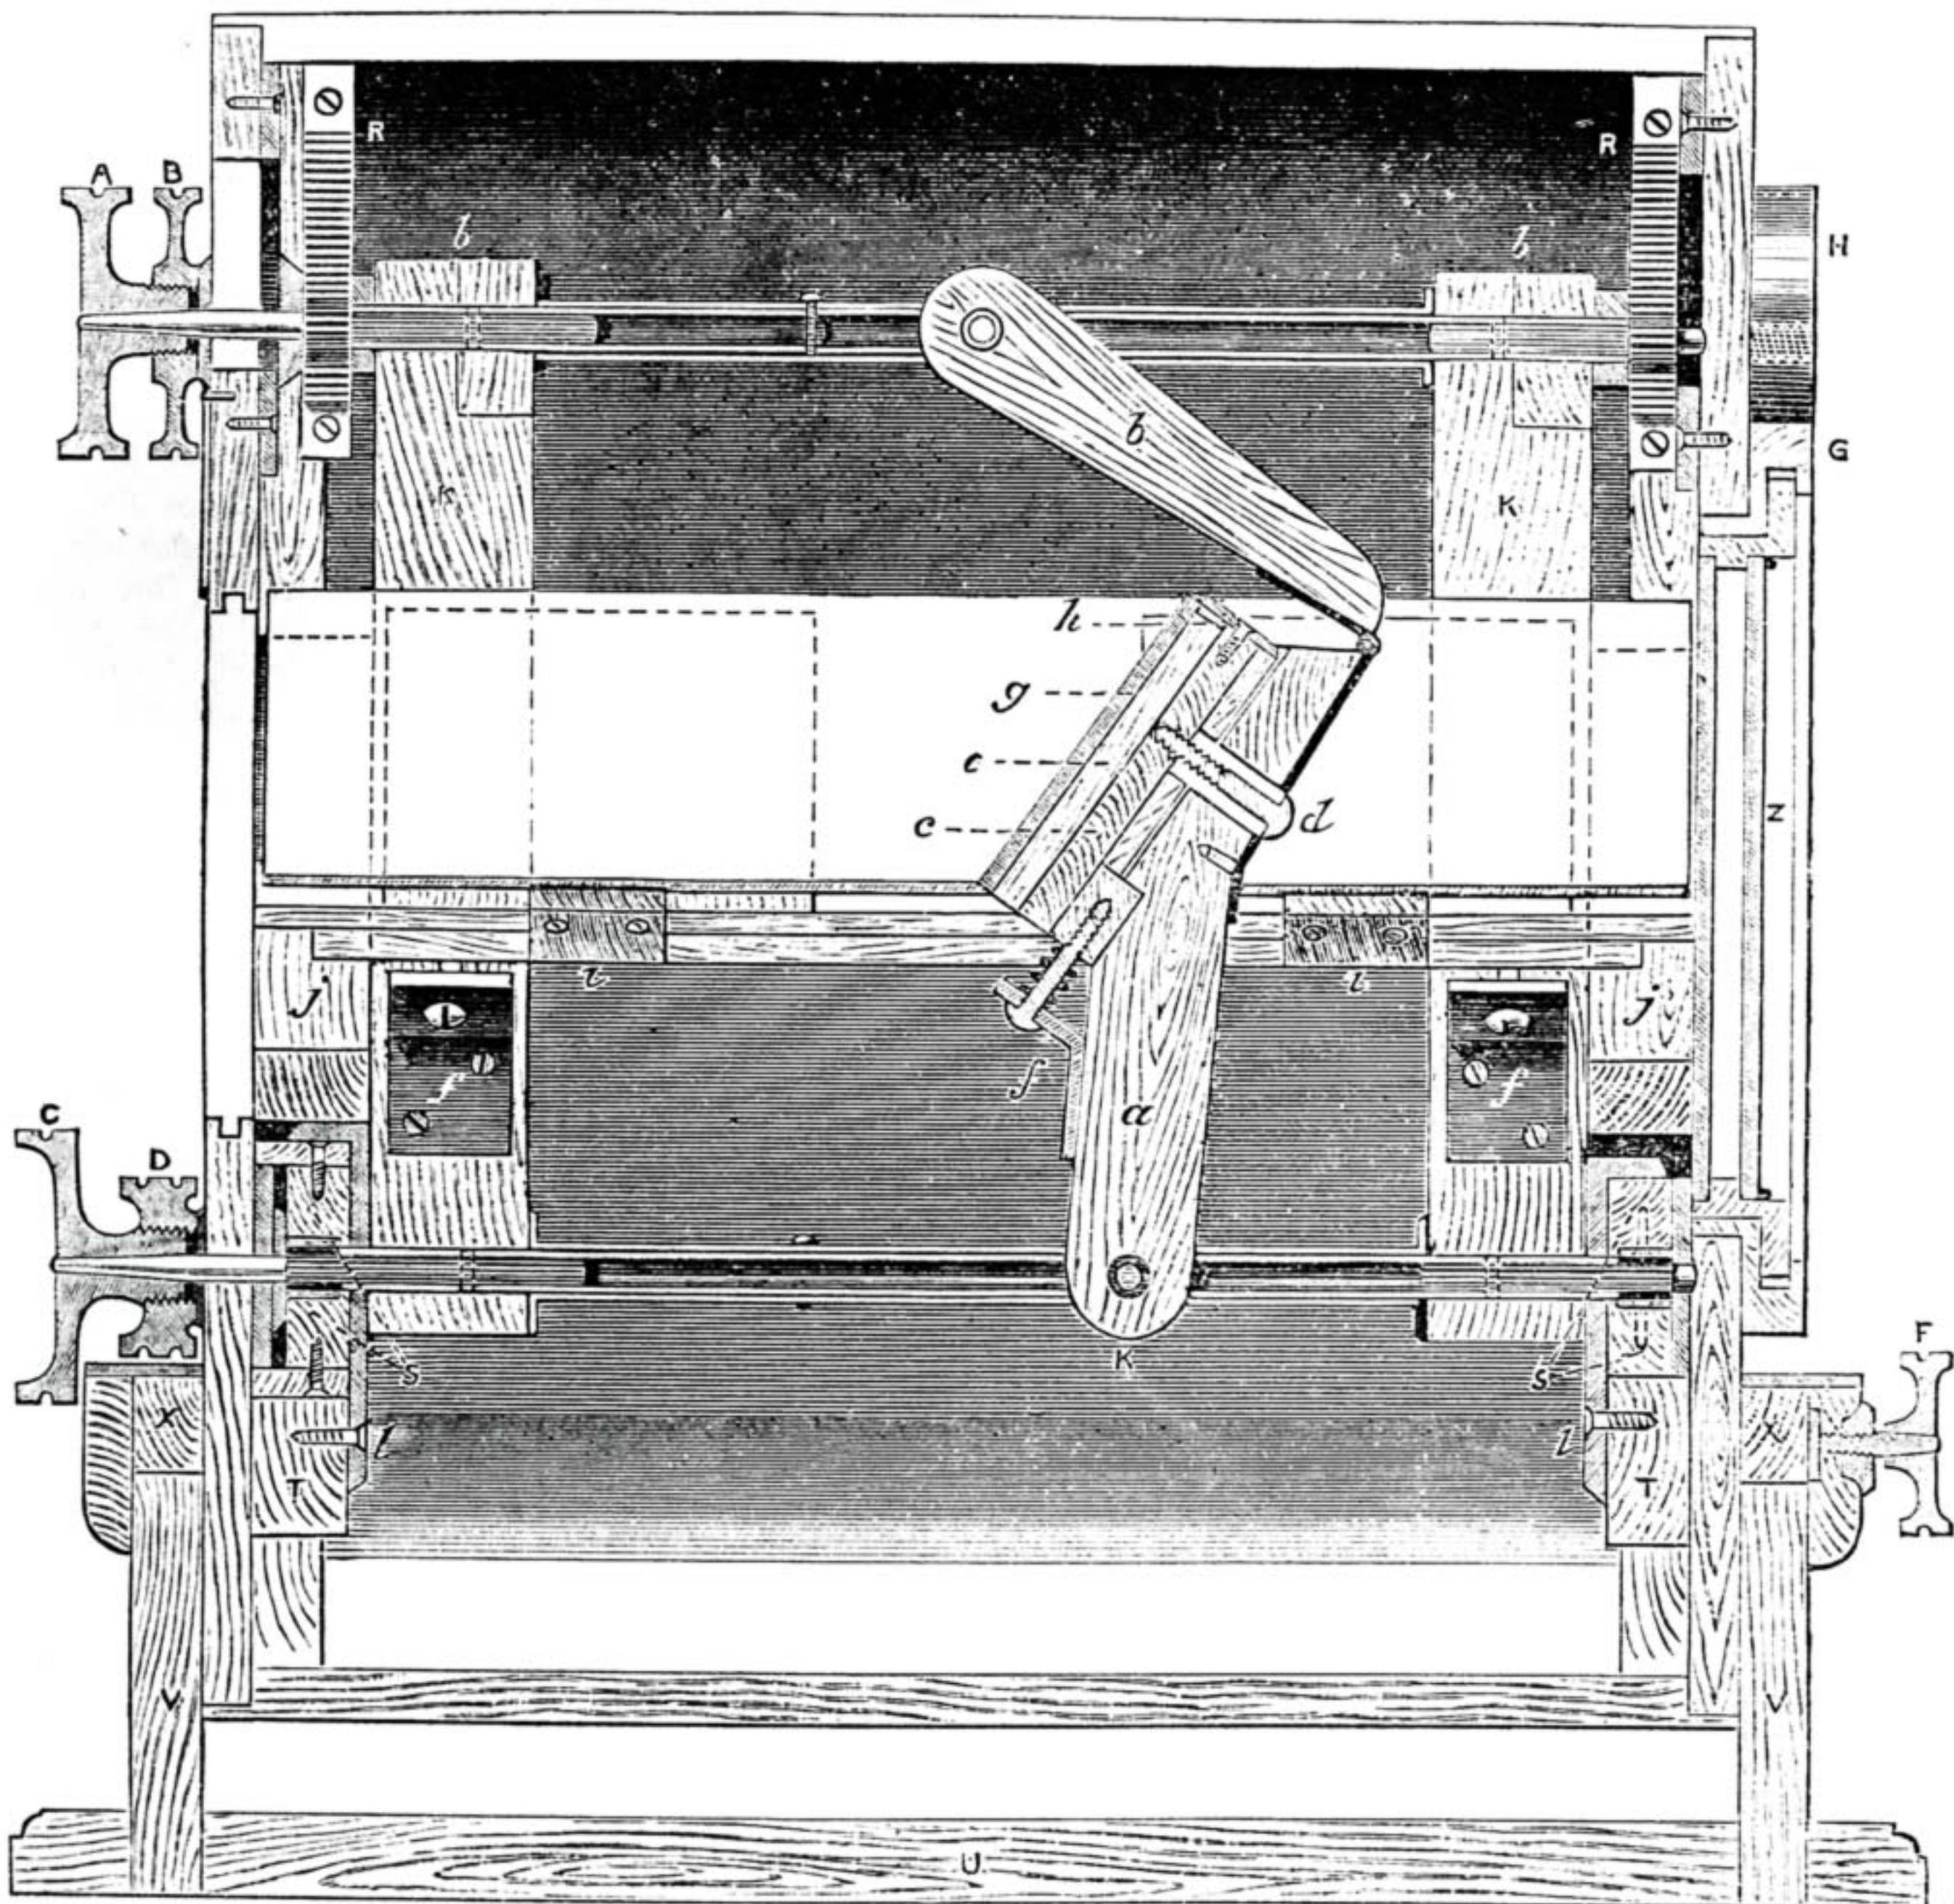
Sectional Elevation on Line M N in Fig. 2, showing also Portions of Interior (Mirrors Inclined) and Section through Centre of Arm. (Scale, half size.)
